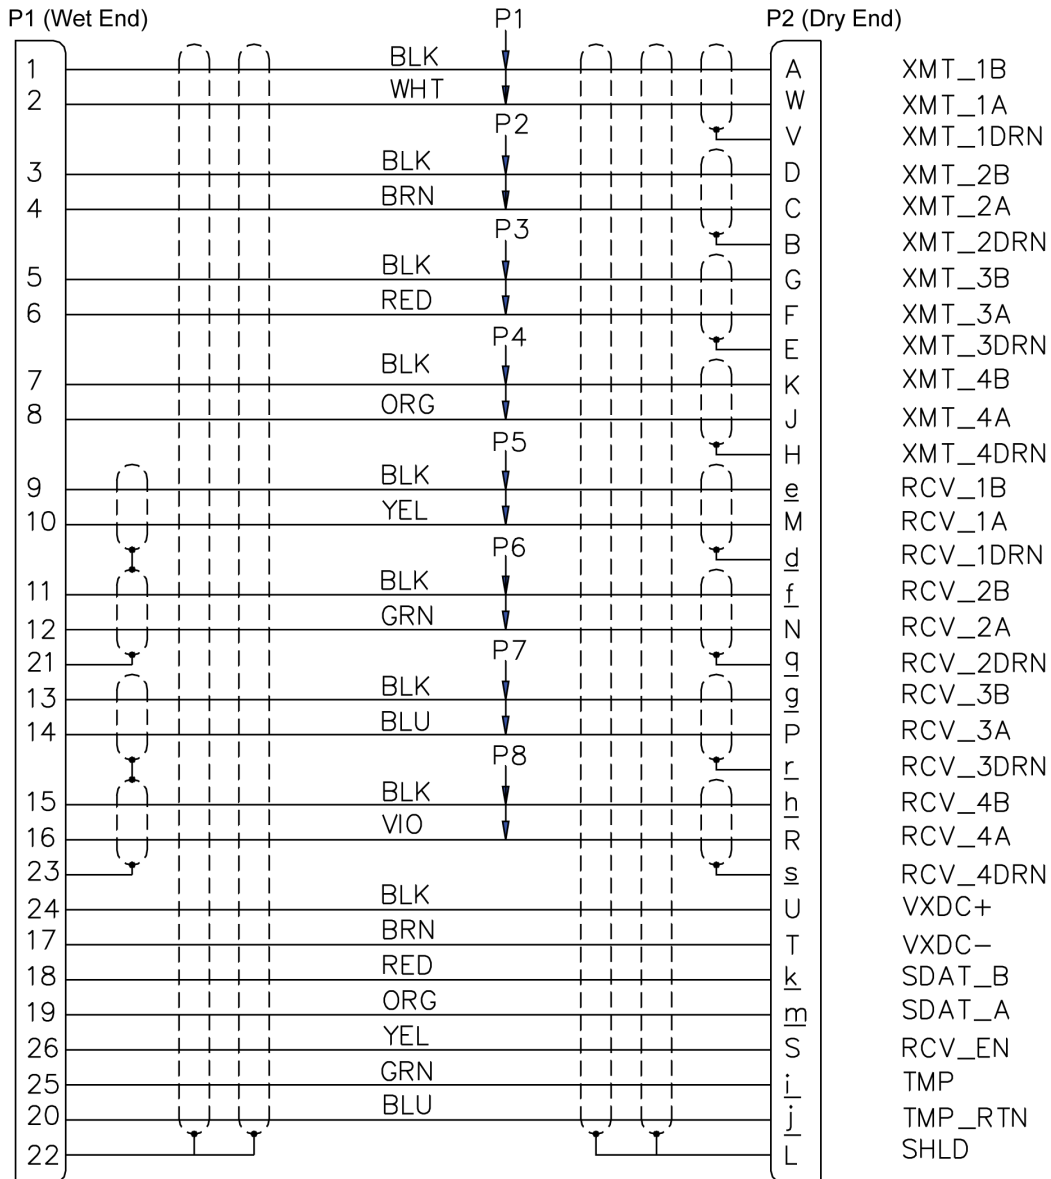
External I/O Cable Wiring (Drawing Number 73A-6010)
